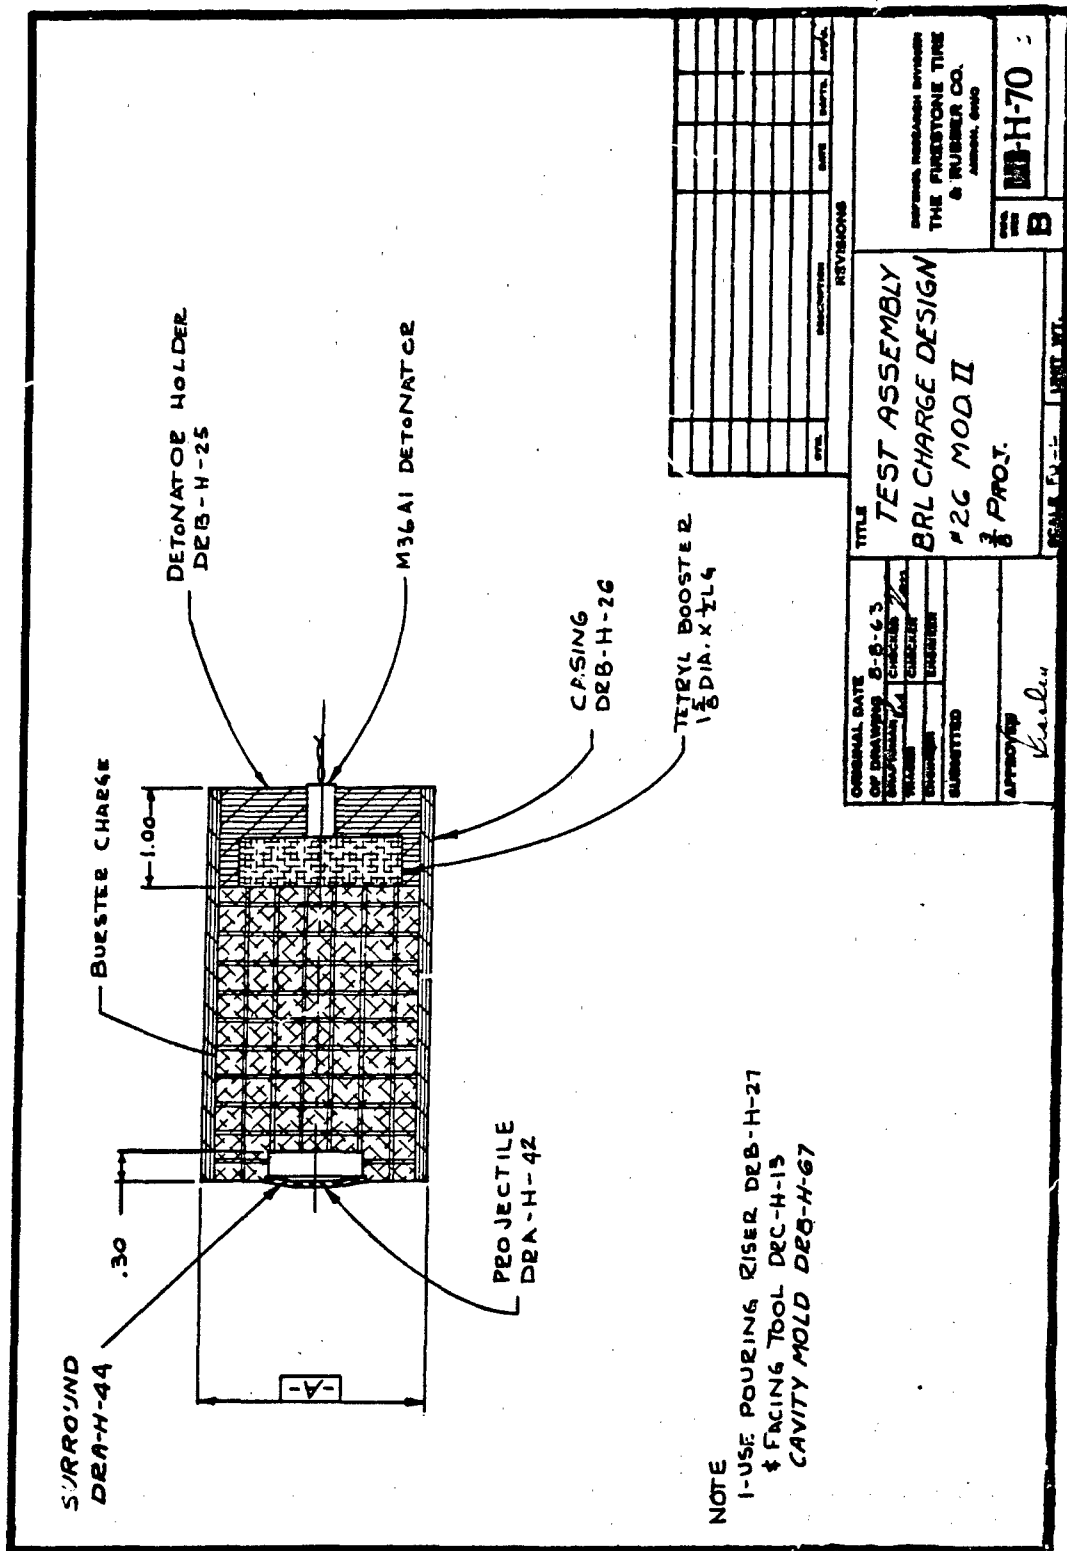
Test Assembly, BRL Design No. 26, Mod. II.
